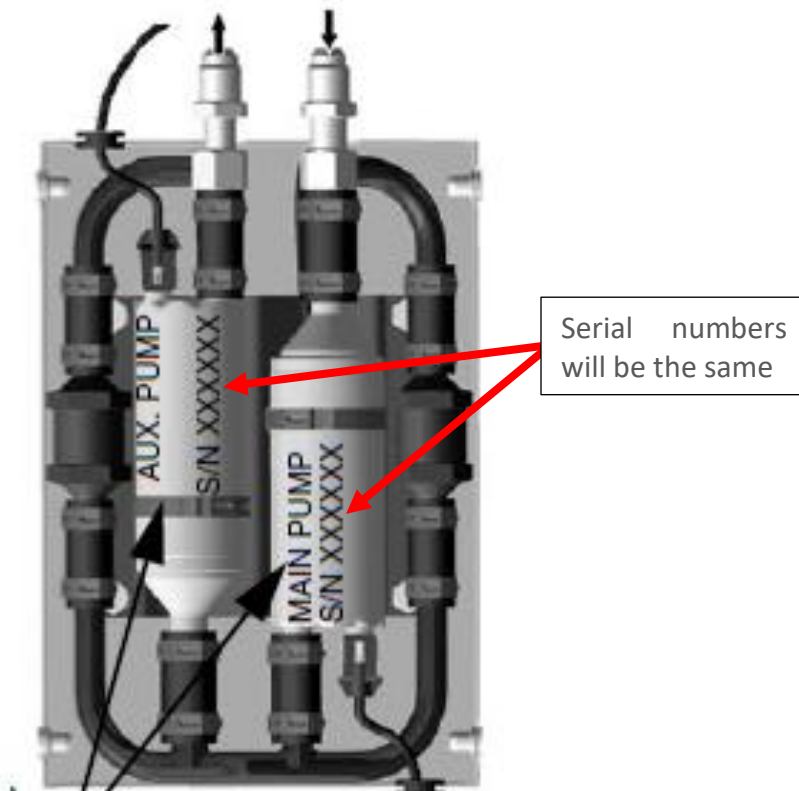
Graphic of approximate location of serial number markings on the fuel pump assembly.
